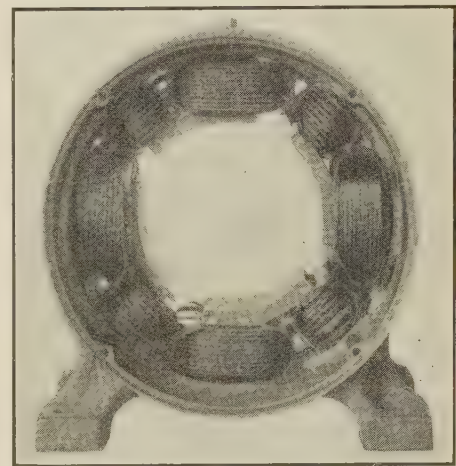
DIVERTER POLE FIELD ASSEMBLY
